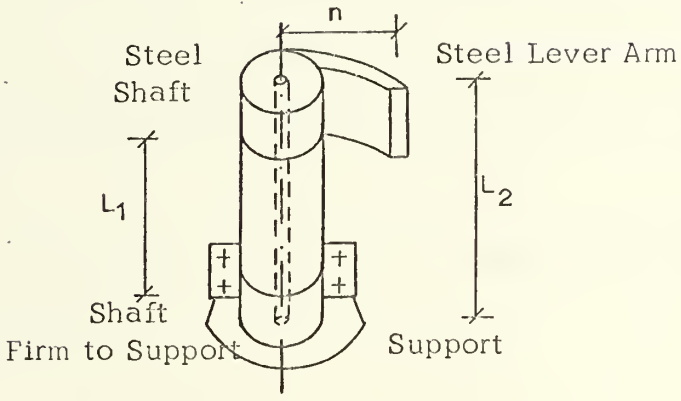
TORSIONAL RUBBER BUFFER WITH STEEL SHAFT
